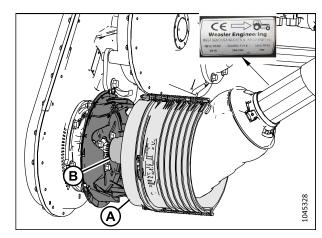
Driveline Installed on Float Module Gearbox Shaft
